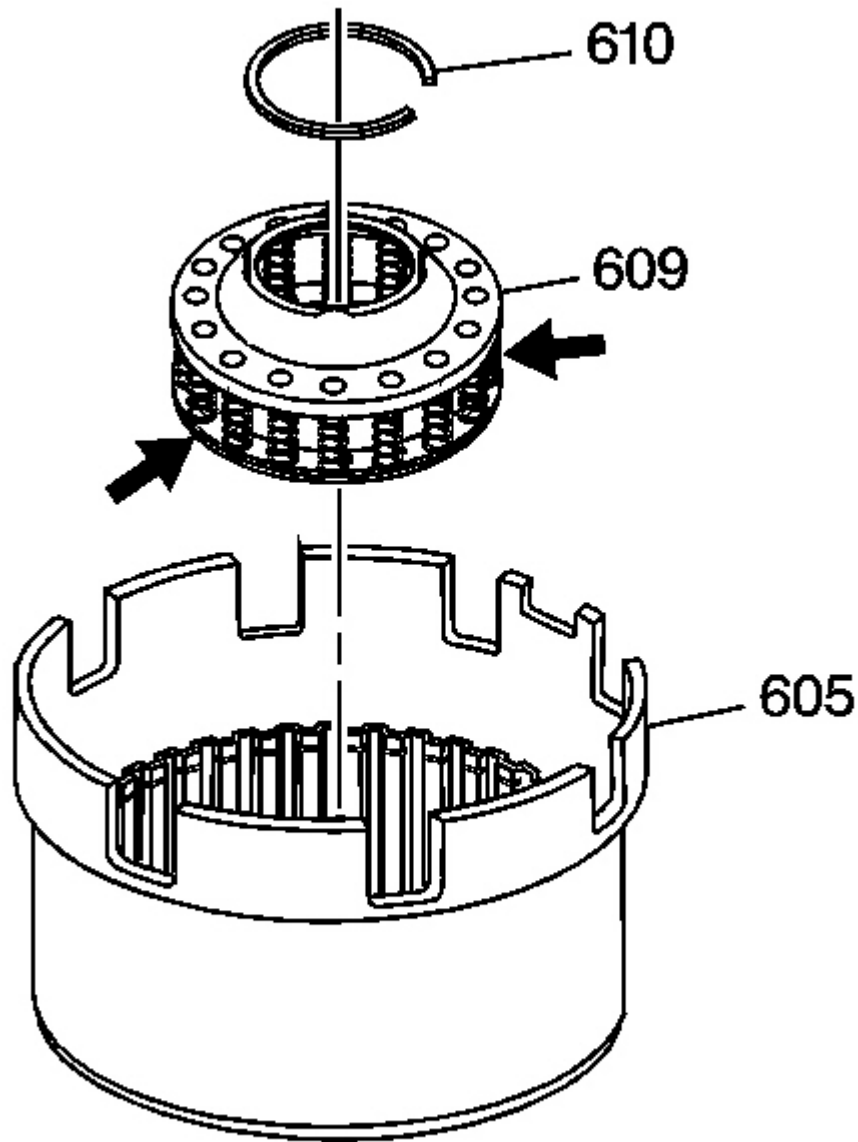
Identifying Reverse Input Clutch Spring Assembly
